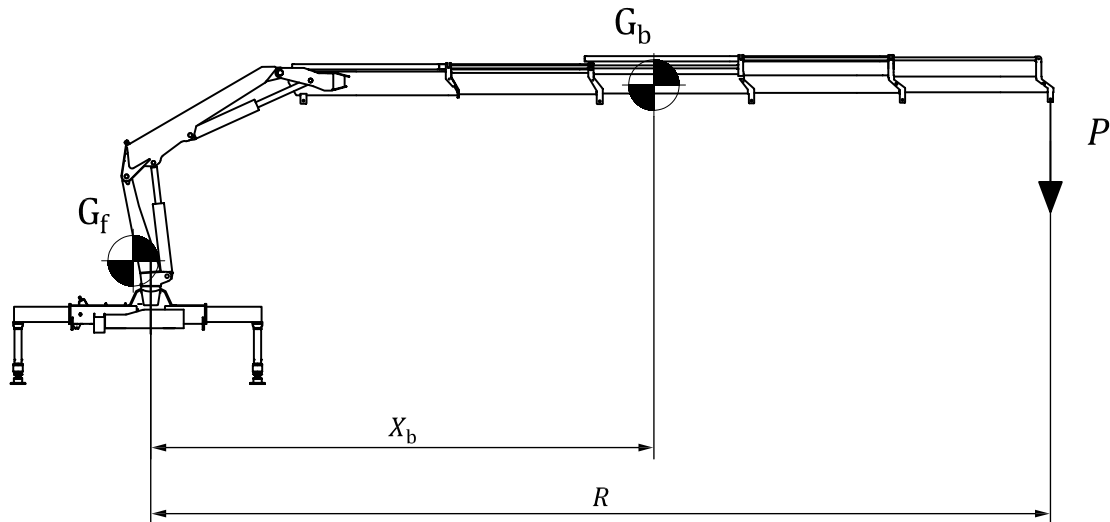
Crane dimensions at maximum hydraulic outreach
